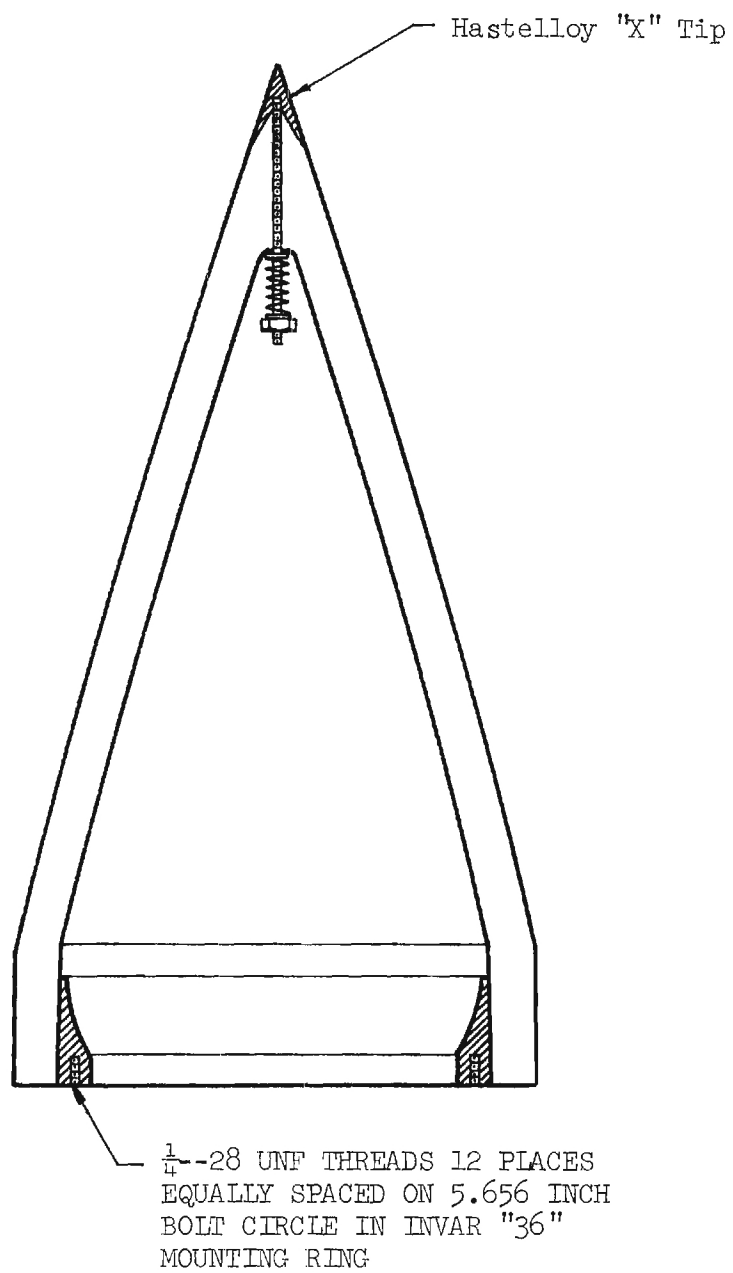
Radome Assembly Showing Tip and Attachment Design.
